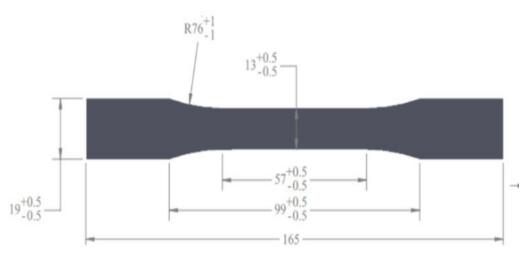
Tensile Test specimen as per ASTM dimensions
